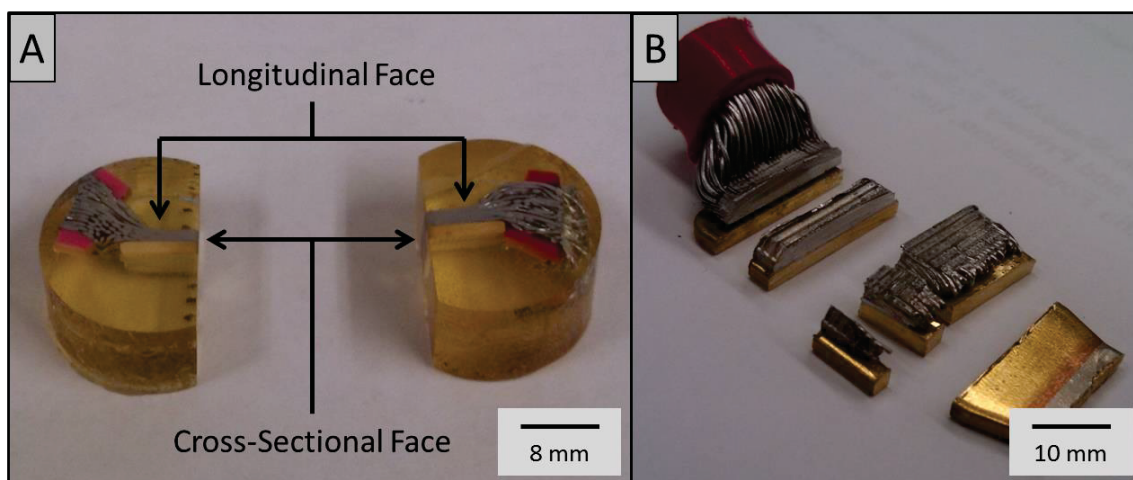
(A) Ultrasonically welded terminals after being embedded in epoxy and cut across the weld area in two directions. (B) Ultrasonically welded terminal cut into pieces.
